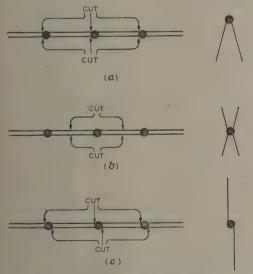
Diagrammatic representation of how beads are manufactured and cut for various types of assembly.
